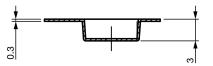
Issue: 4; 12.06.13
